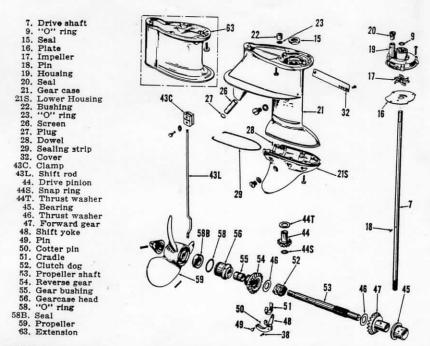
Exploded view of gear case assembly and water pump of the general type used.
